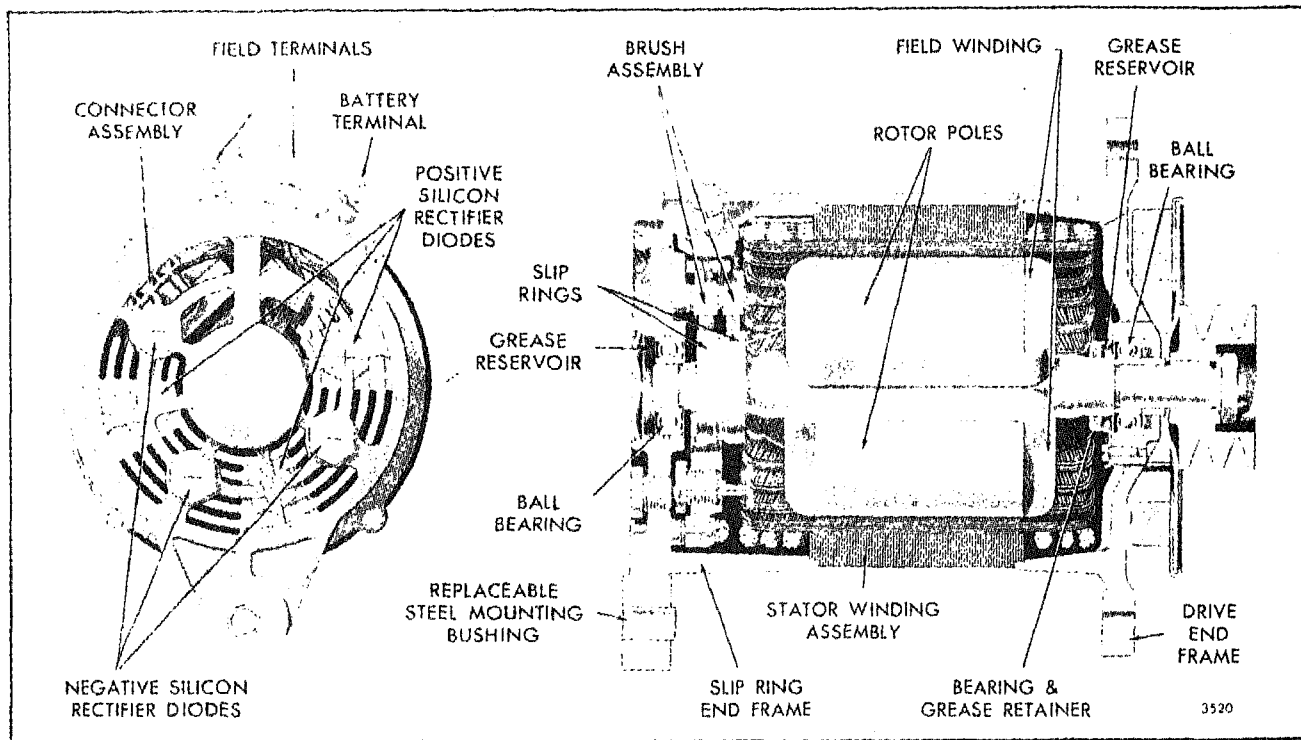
30 DN Type 100 A.C. Self-Rectifying Generator (Alternator)
